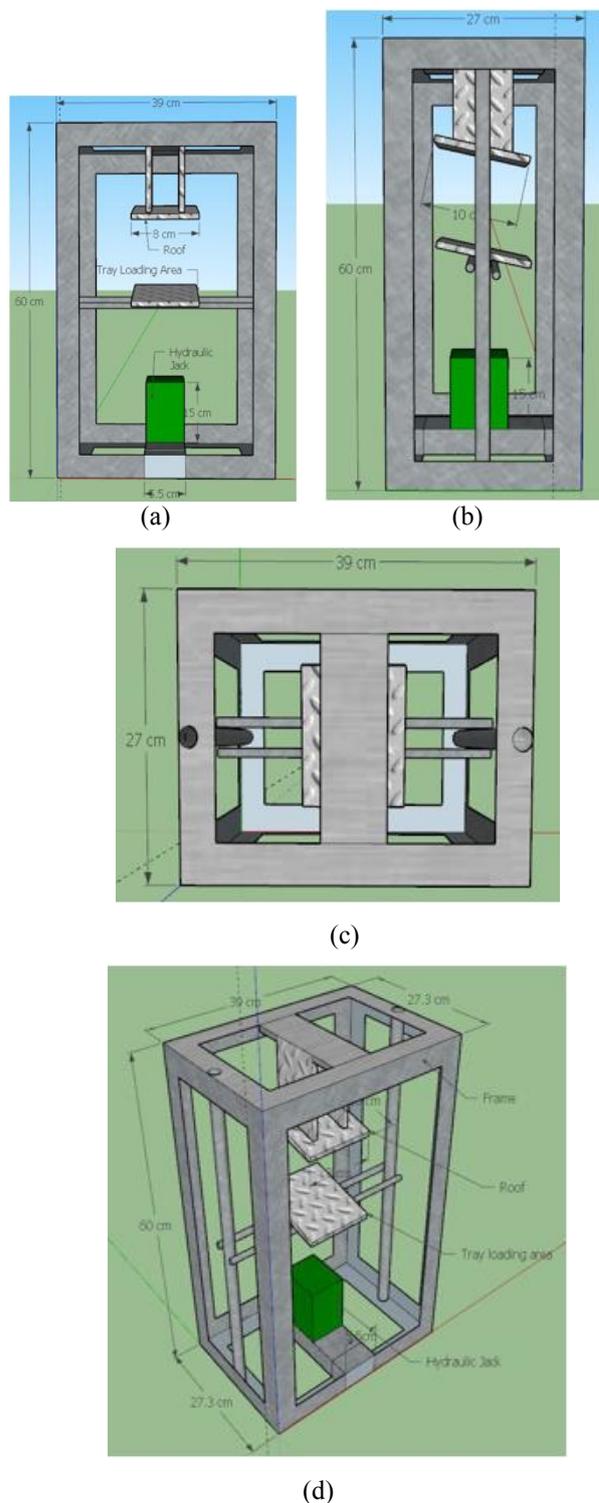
Fabricated hydraulic manual press: (a) Front view, (b) Right-side view, (c) Top view, (d) Isometric view.
